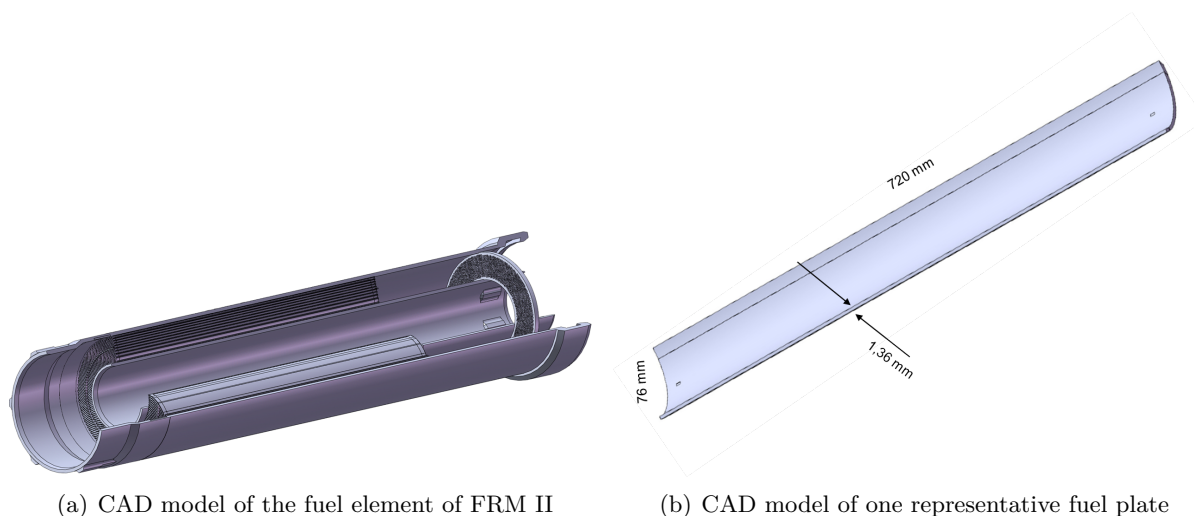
The left panel (a) shows a CAD model of a fuel element of FRM II. The sieve, fuel plates and the tube for the control rod can be clearly seen. In the right panel (b) a CAD model with dimensions of a representative fuel plate is shown.
